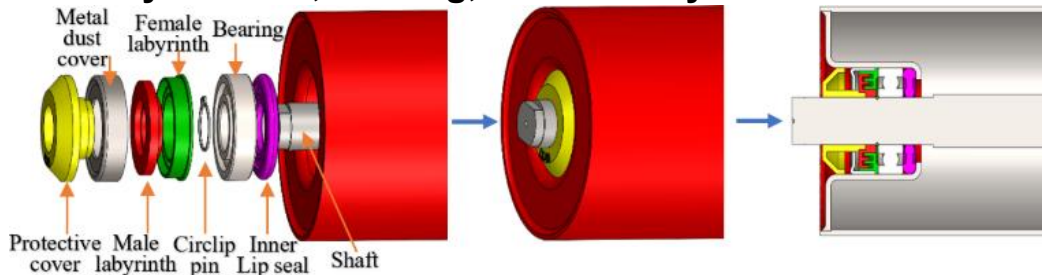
Assembly method for seals, bearing, shaft and cylinder-hub
